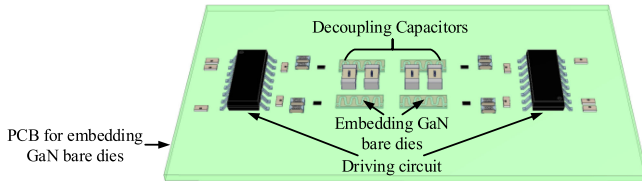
Simplified 3-D view of the proposed PCB embedded module.
